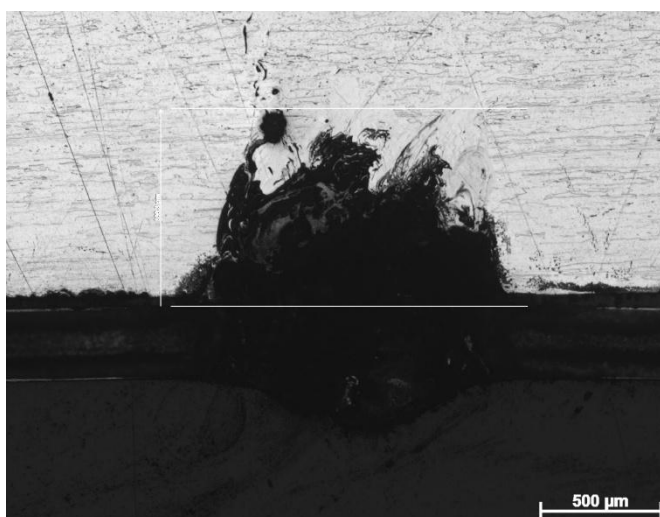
T11 Sample 5x Magnified Weld Penetration Zone
